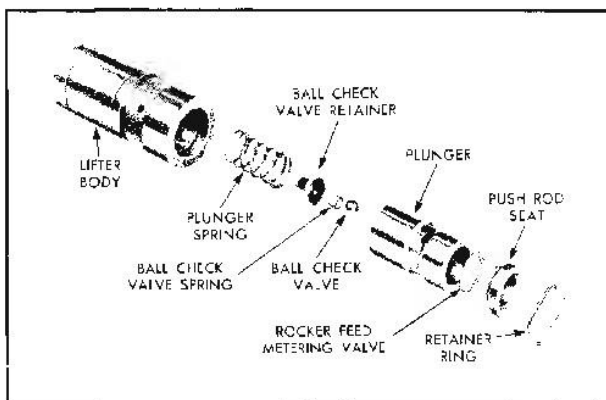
Exploded View - 326 H.O. with Synchronesh Valve Lifter
